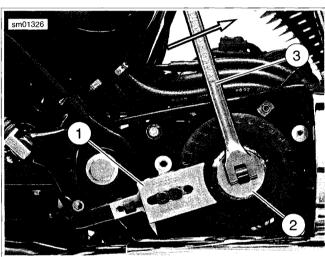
Transmission Sprocket Assembly: All Models (XL Model Shown)
